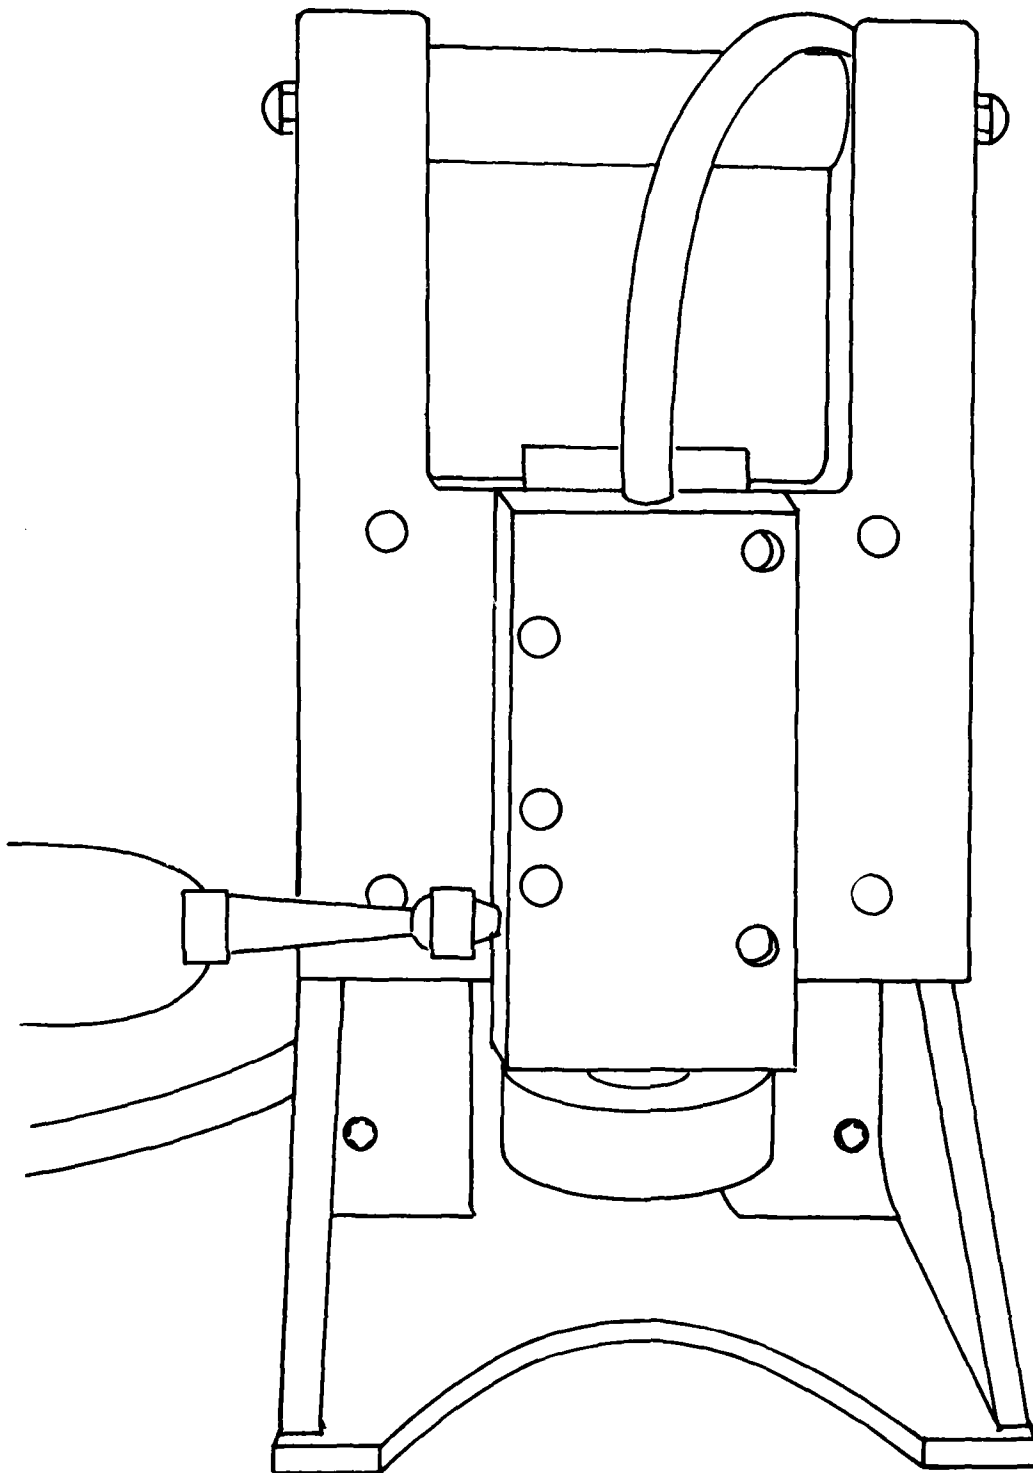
INJECTION OF POLYURETHANE INTO MOLD
